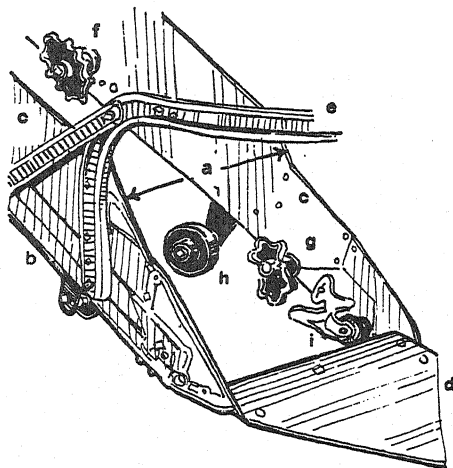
Detail of main frame, shovel, sideboards, and beam.
